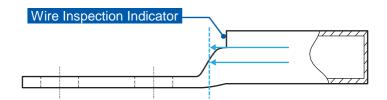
Inserting a Power Cable into a Cable Lug, Depth Reference Diagram
